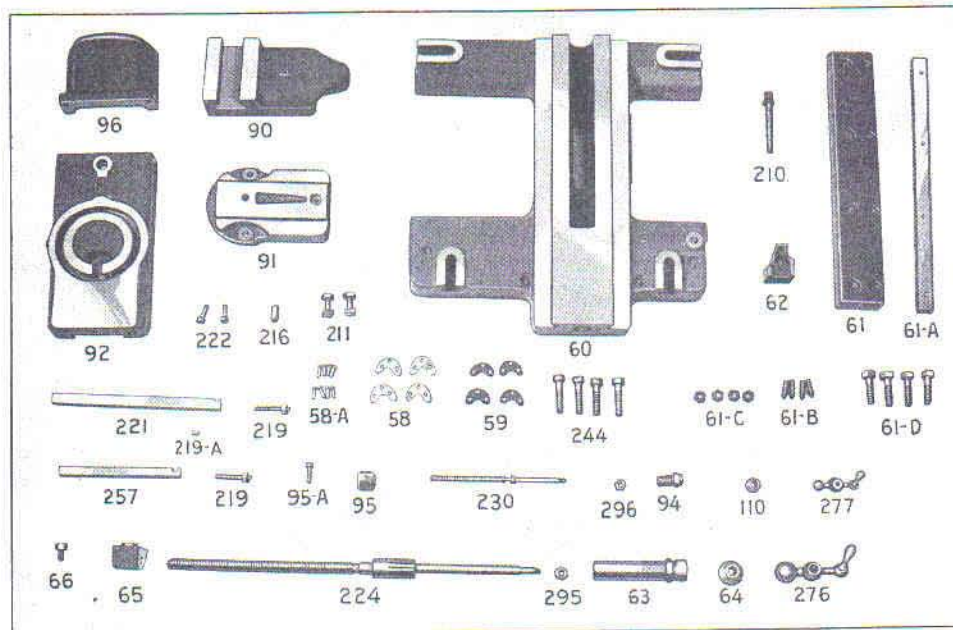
Saddle and Compound Rest Parts for Series "N" Lathes.
